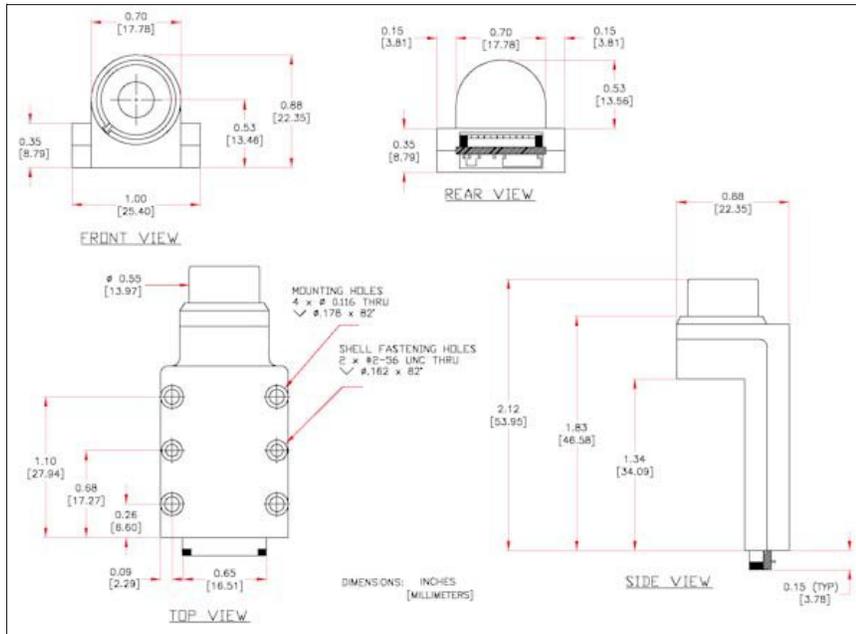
AXR/PA-230 with housing mechanical dimensions.
